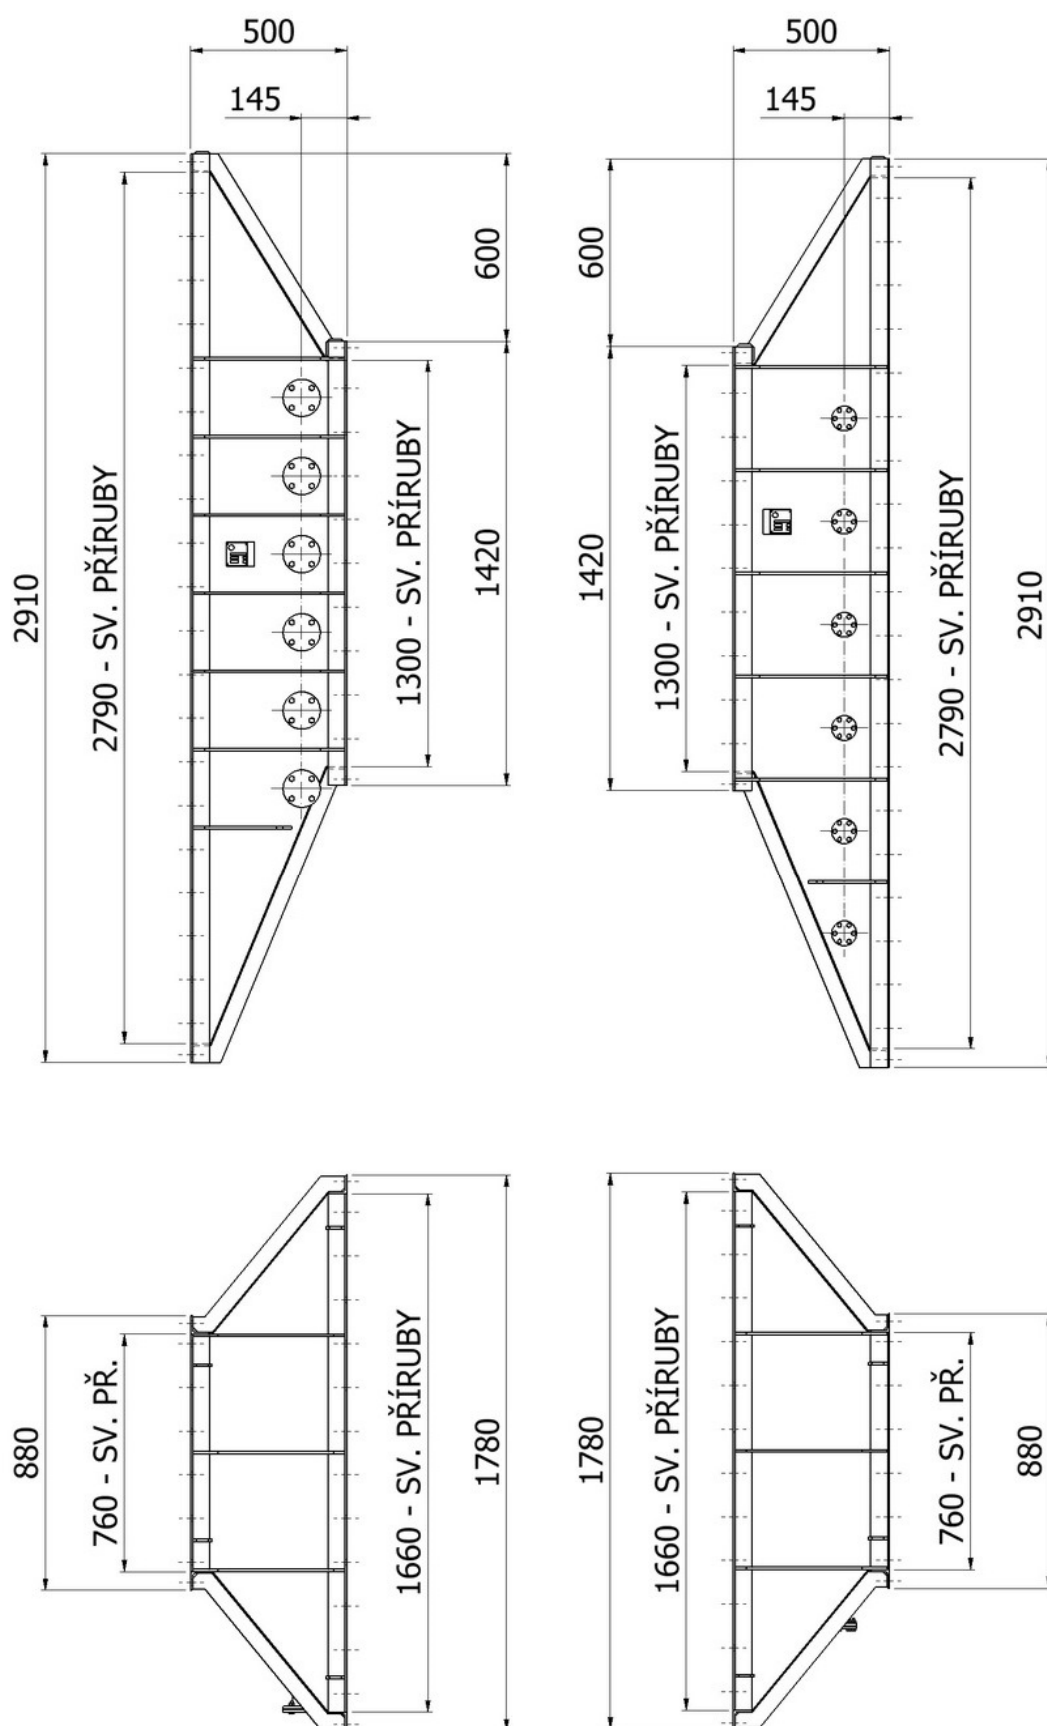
Main dimensions of the VSS 16 connecting parts, solid right-hand model
